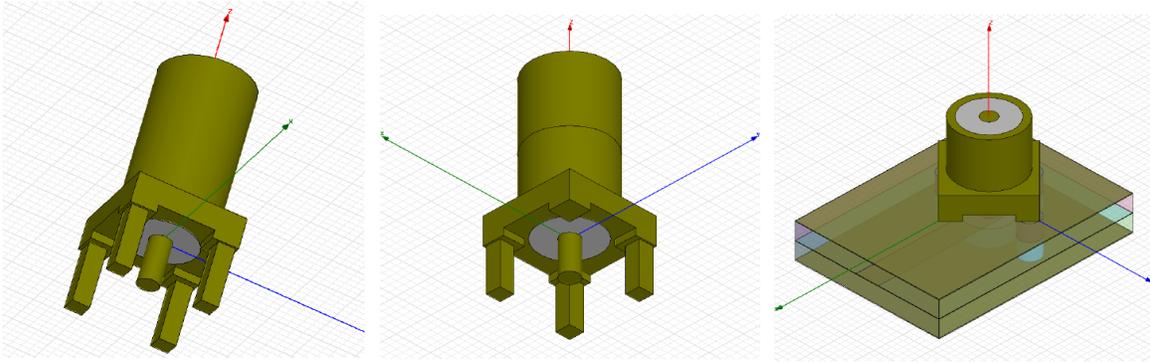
SMA Connector / Modified Connector / Assembly without Thru Holes
